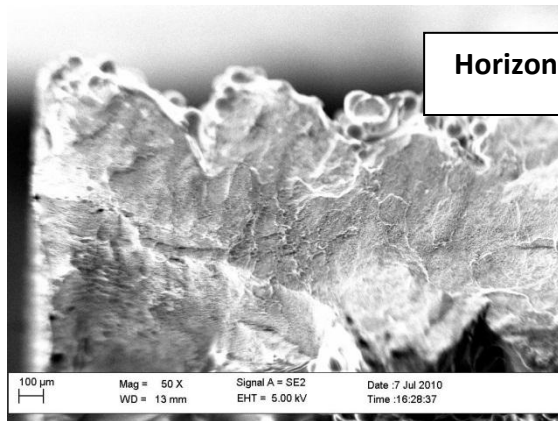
Fracture surface of the horizontal specimen after tensile testing
